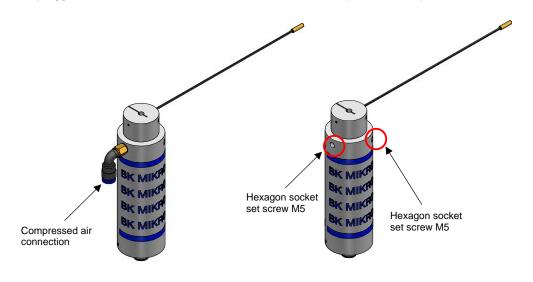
Option: Air barrier light connection TK94A / TK94RL
